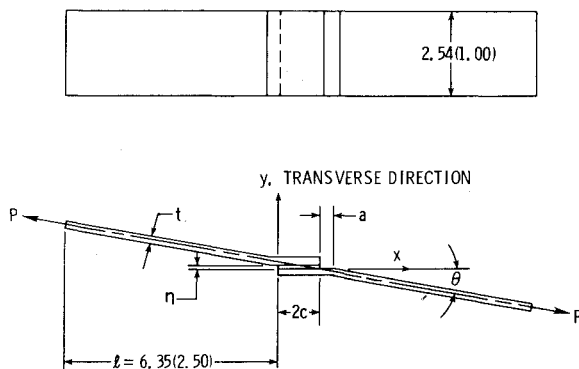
Bonded single lap joint with preformed adherends. Dimensions in centimeters (inches).
